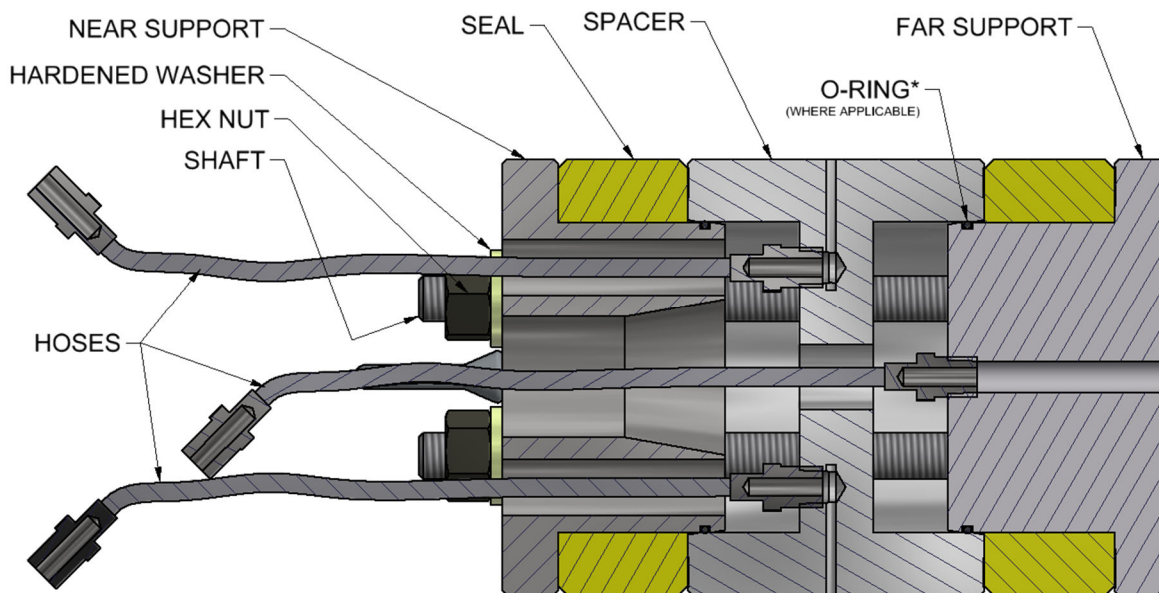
Double Block and Bleed Isolation Plug 4" - 6" Plug Components
